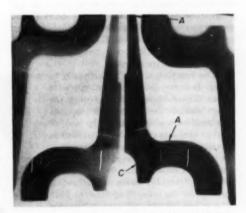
Radiographs of Four Sections Cut From Test 6 (Table I) Showing Cross Section of Flange, Extent of Burnished Surface, and Location of Fatigue Cracks Near Bead Seat Radius. Surface A-A is burnished; surface C mates semicircular groove in wheel rim to house a retainer ring
